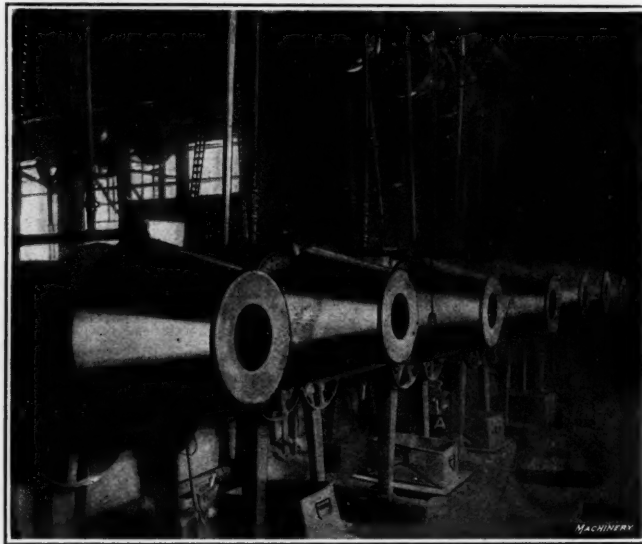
Charging End of American Rotary Gas Furnaces in which Balls up to One Inch Diameter are heat-treated
